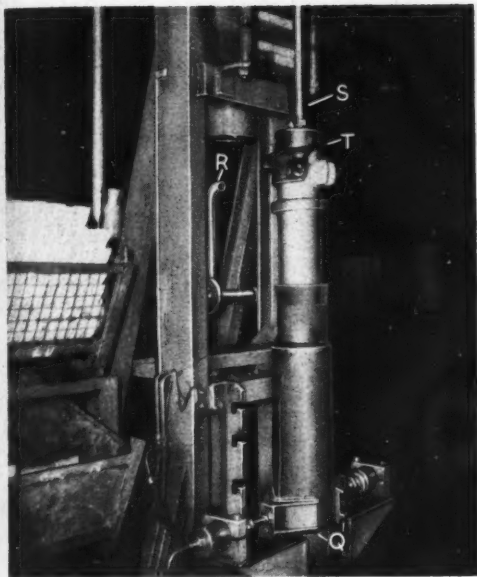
In this hydraulic rig, the outer tube sub-assemblies are filled with hydraulic fluid
